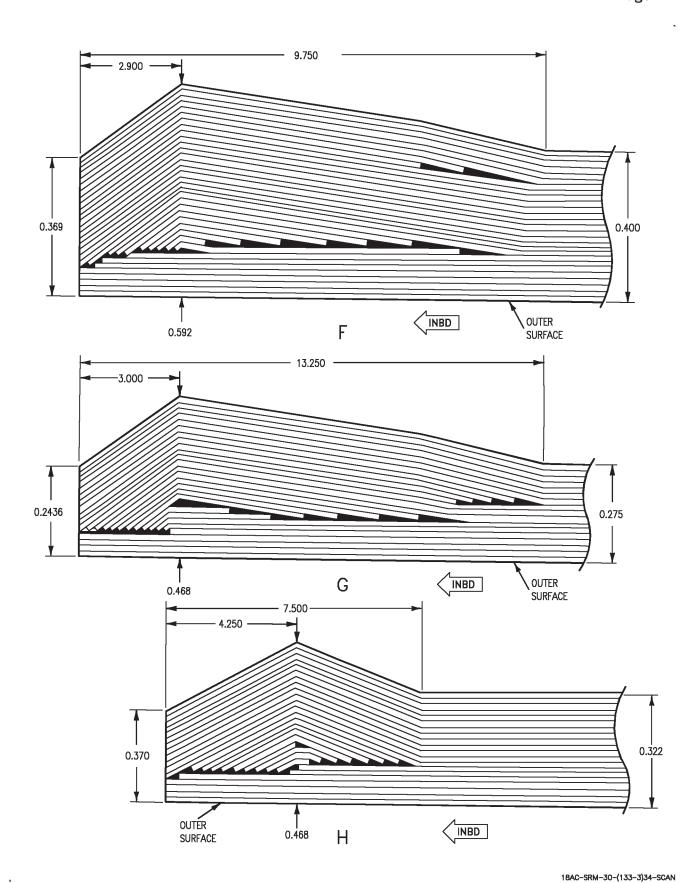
Outer Wing Lower Surface Inspection Areas (Sheet 3)
